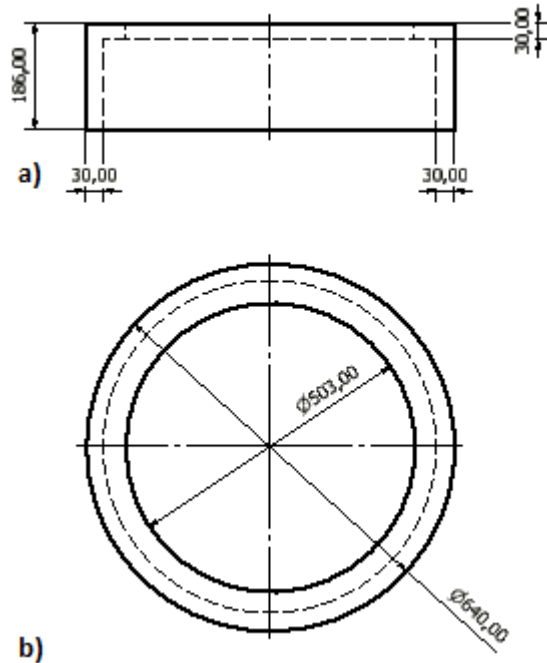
Dimensions (in mm) of the TI-S design from a) the front view and b) the top view
